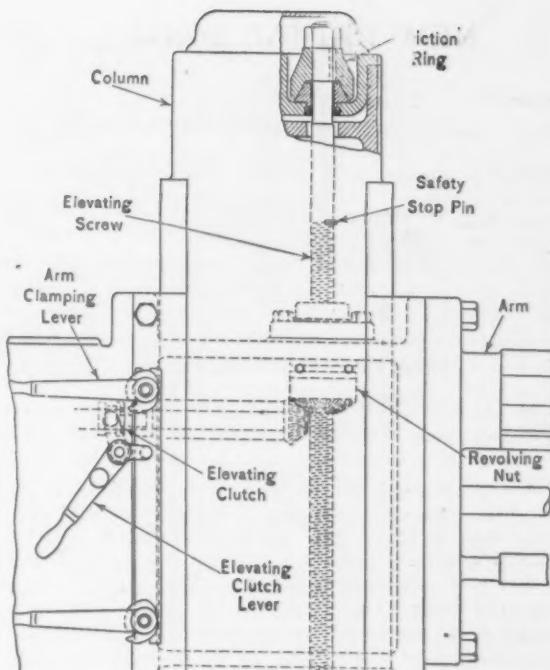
Arm Elevating Mechanism and Automatic Arm Stop
